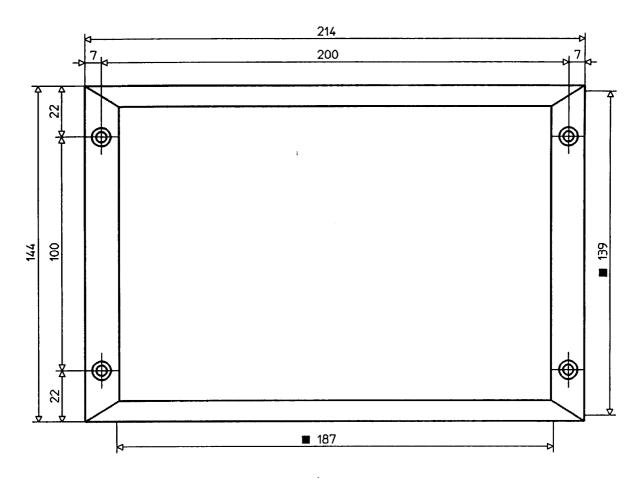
Dimensional drawing EP2-32 (all dimensions in mm)
